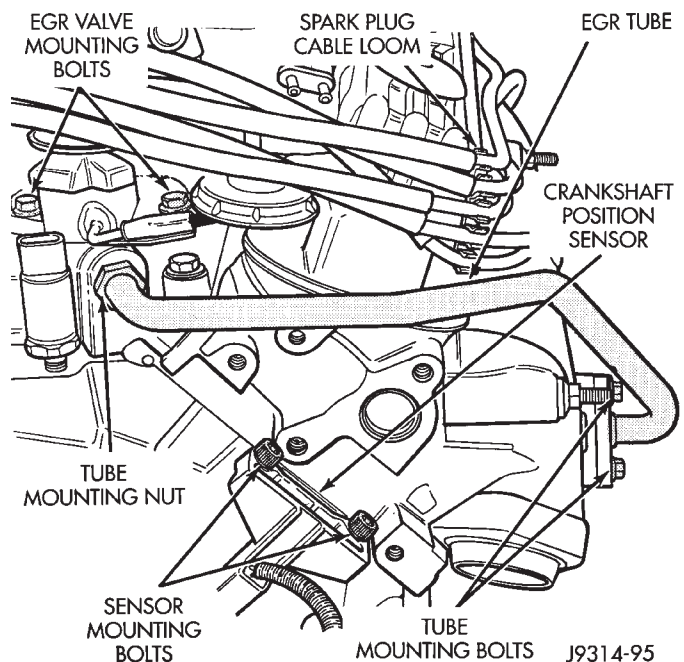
EGR Valve Mounting Bolts—5.2L Engines
